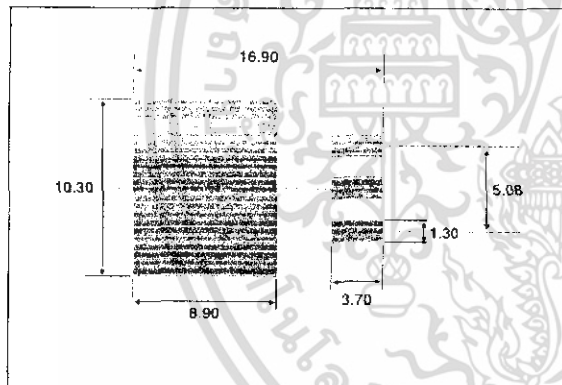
D²PAK Foot Print Dimensions (in millimeters)
